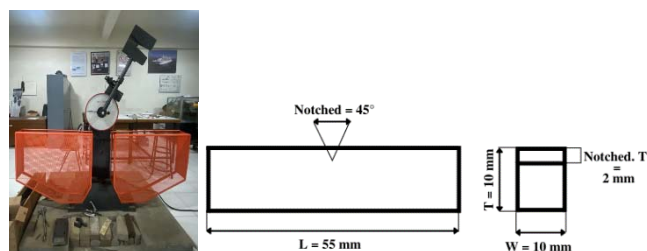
Impact test instrument a) testing machine, b) specimen dimension
